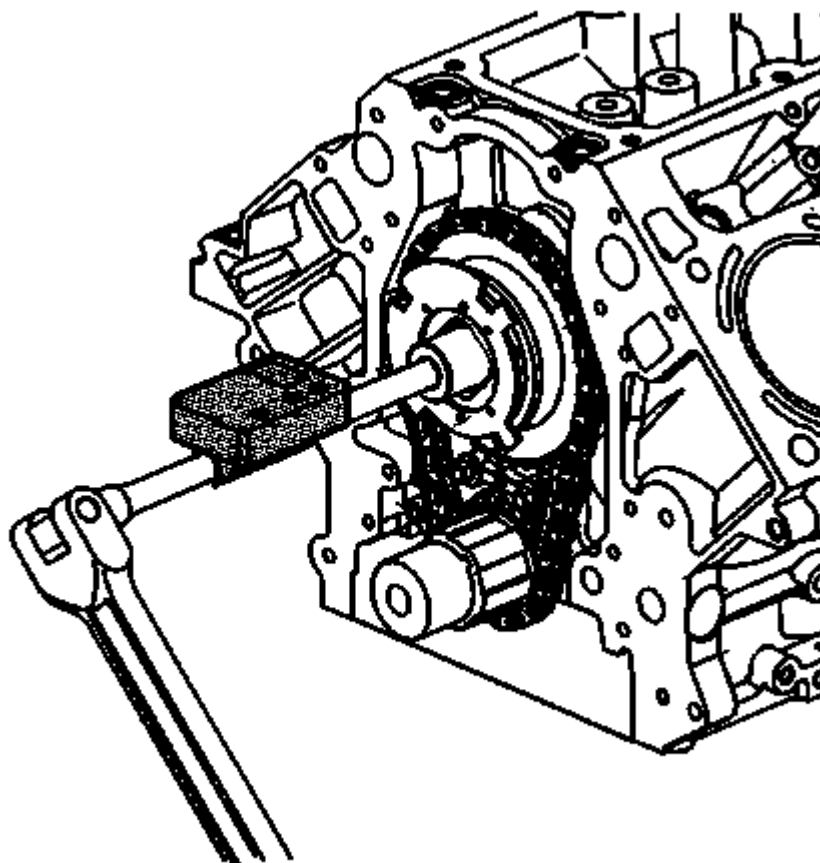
Marking Position Of Chain To Camshaft Position Actuator - Exhaust
